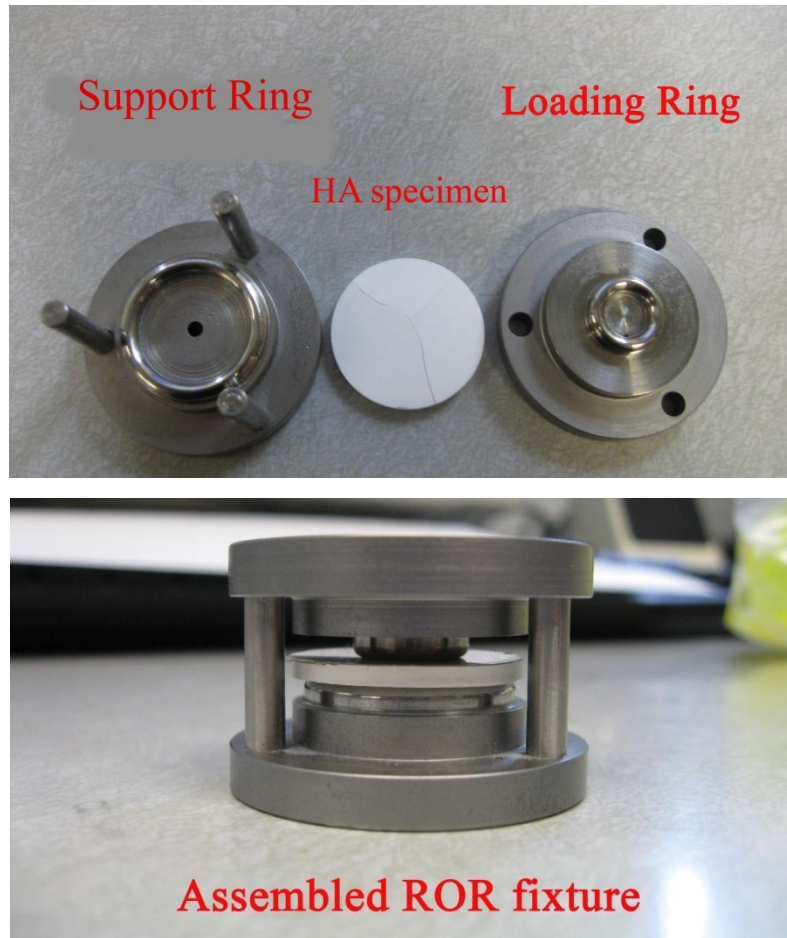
B1. Digital image of (a) the ring-on-ring fixture showing the specimen support ring and loading ring used in the biaxial flexure testing in this study; (b) the assembled ring-on-ring fixture used in the biaxial flexure testing in this study.
